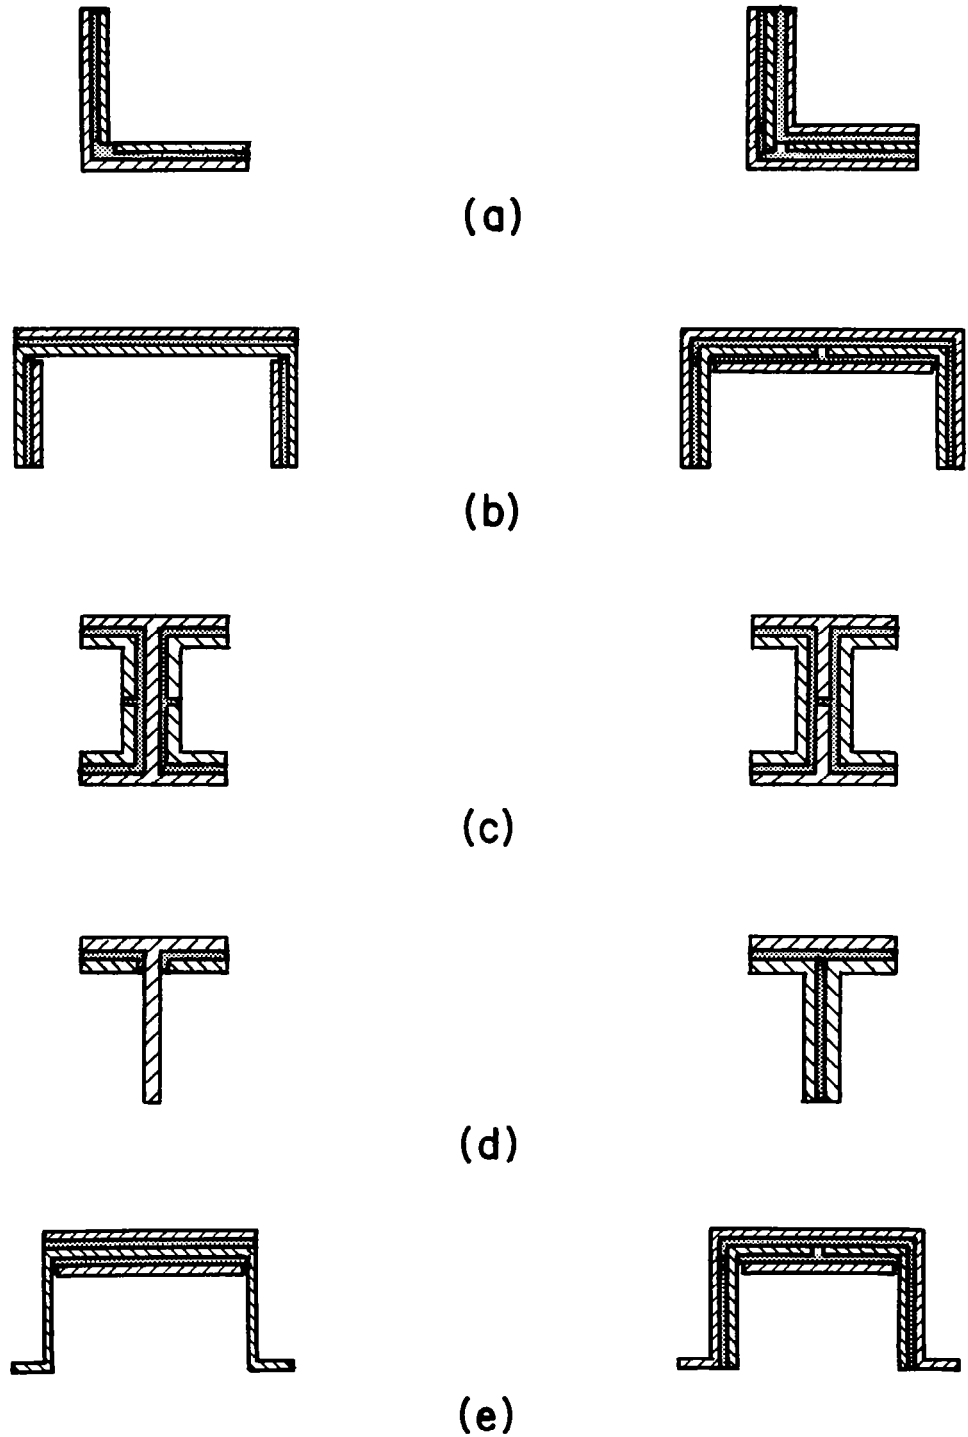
Cross-sections of viscoelastic shear-damped composite structural beams of multilaminate construction: (a) angle, (b) channel, (c) I-section, (d) T-section, and (e) hat-section designs
